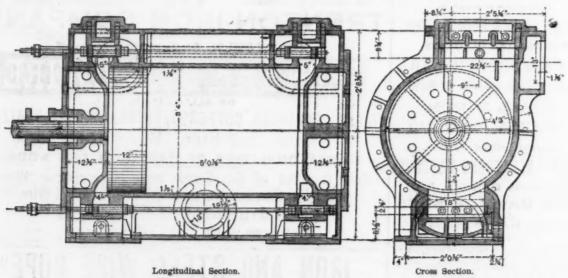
Vertical Sections through the Cylinder.—Scale, 1/2 Inch to the Foot
